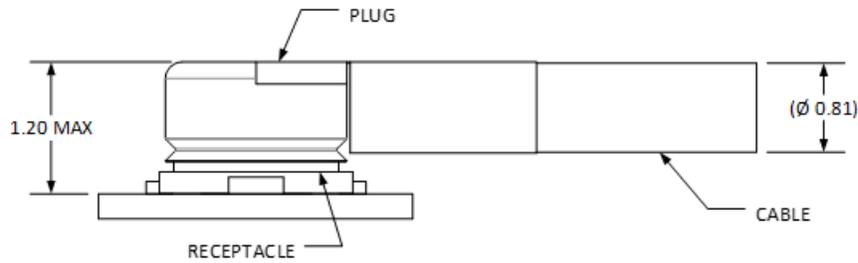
Mated Plug for Ø 0.81 mm Coax Cable
